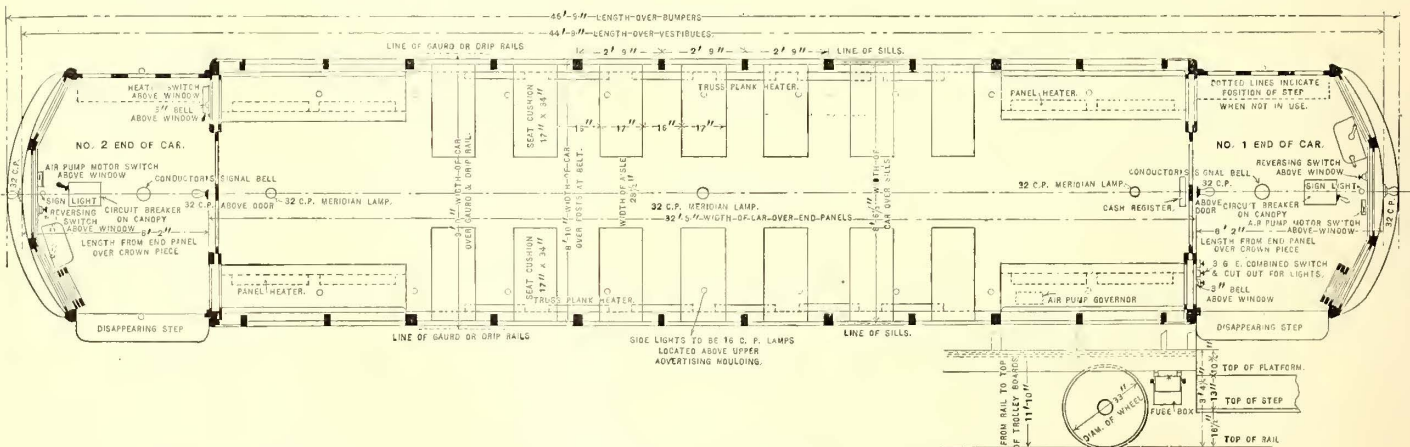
PLAN OF CAR, SHOWING DIMENSIONS AND LOCATIONS OF SEATS, HEATERS, SWITCHES, ETC.
